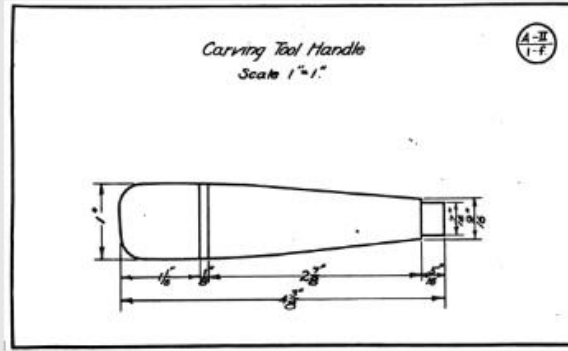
Similarly, this carving tool handle makes for a good starting point for a shorter-handled garden tool.
